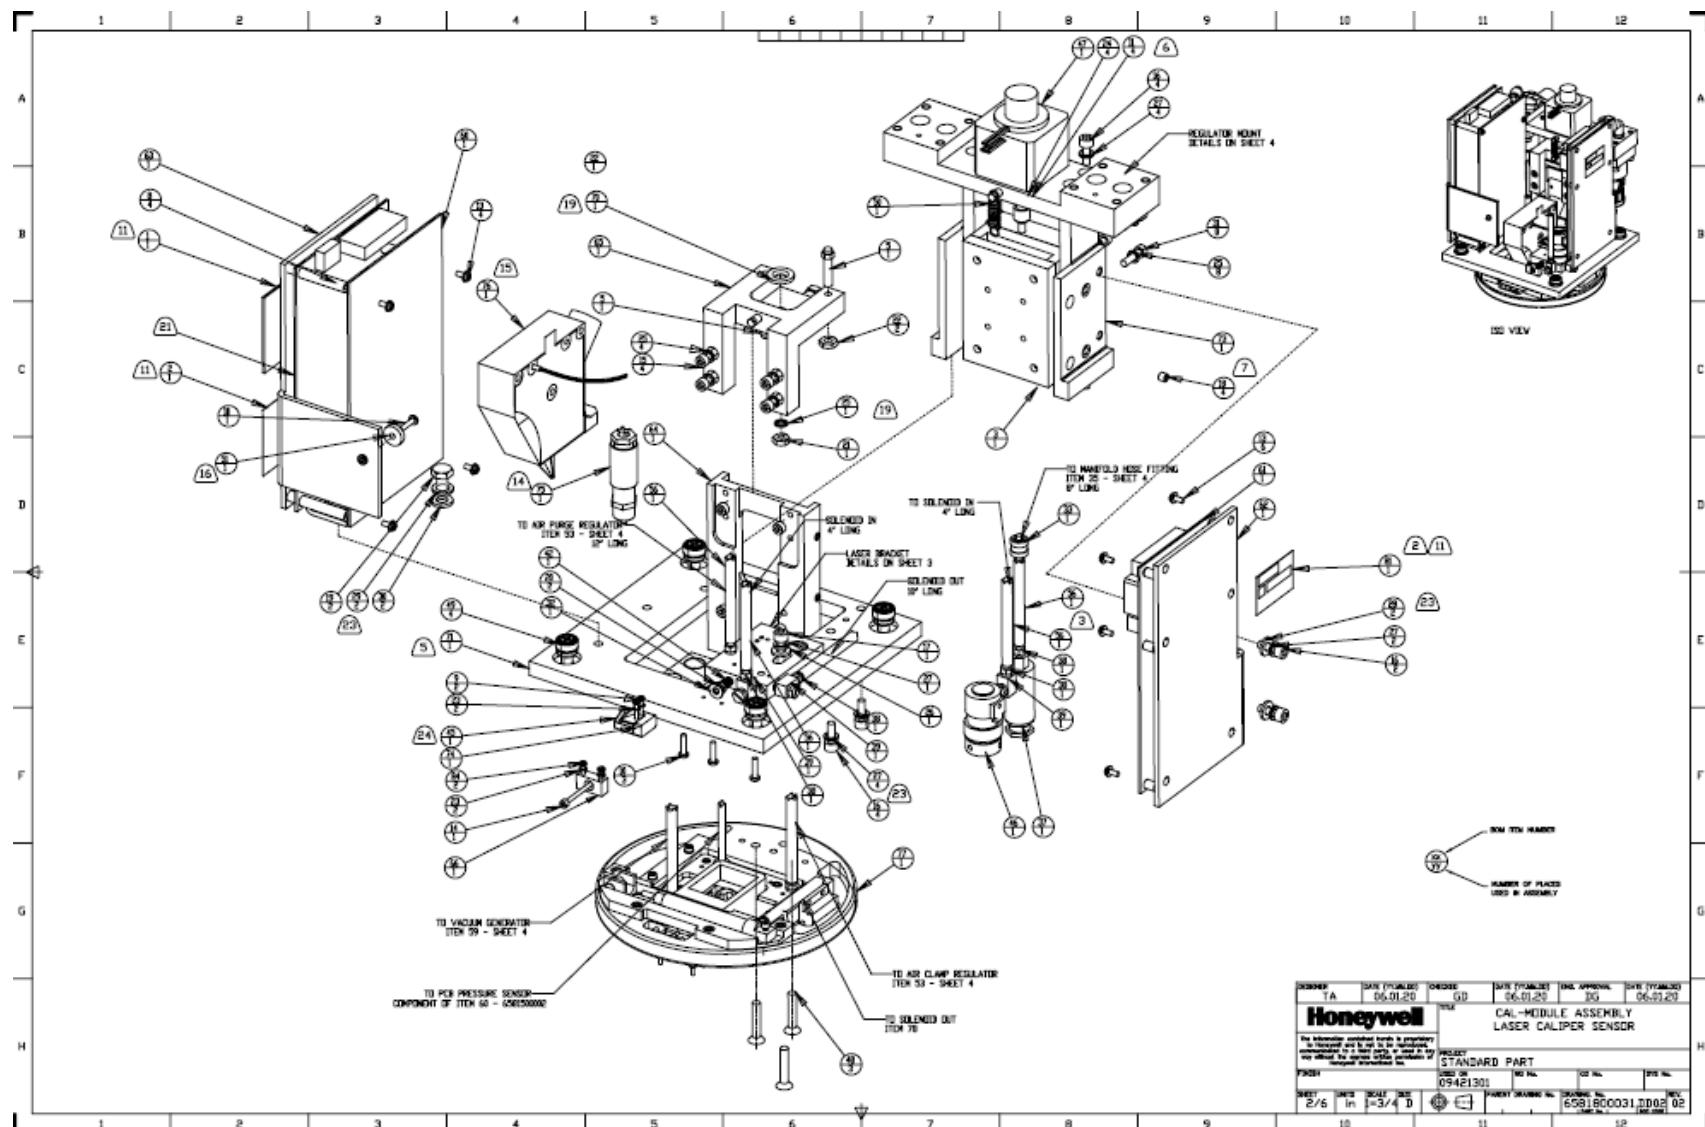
6581800031: laser caliper sensor cal-module assembly (2/6)
